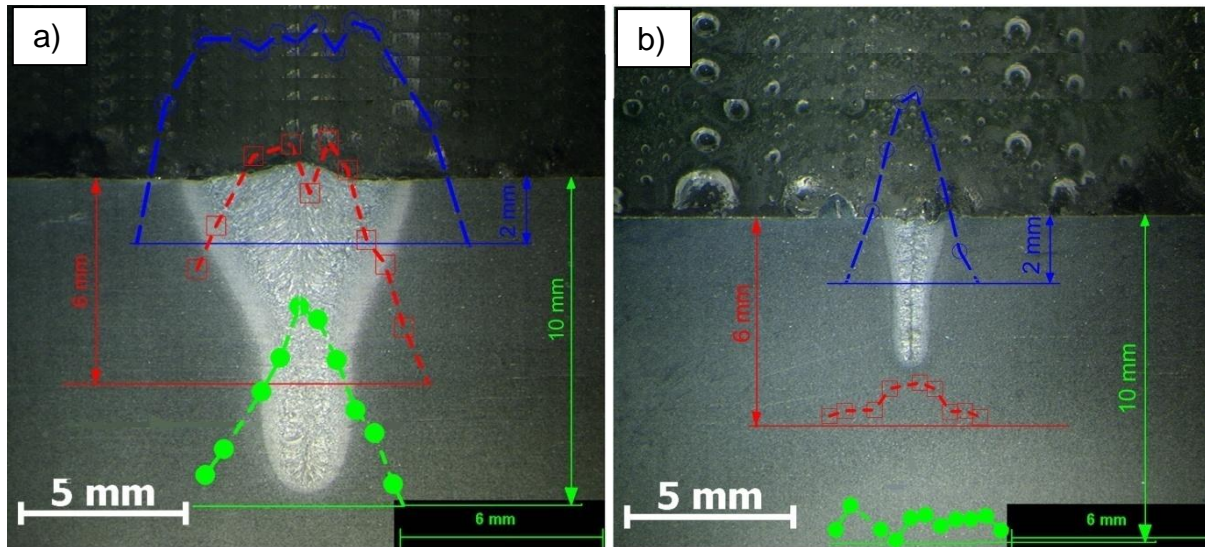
Macrographs with embedded longitudinal microstrain profiles measured at different depths; a) laser weld 7 kW and 1 m min⁻¹; b) laser weld 7 kW 6 m min⁻¹
